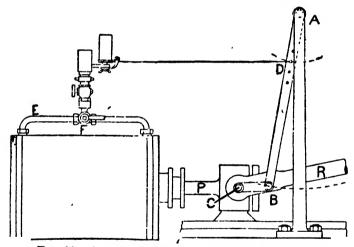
An arrangement for connecting up and driving an indicator on a steam engine.
